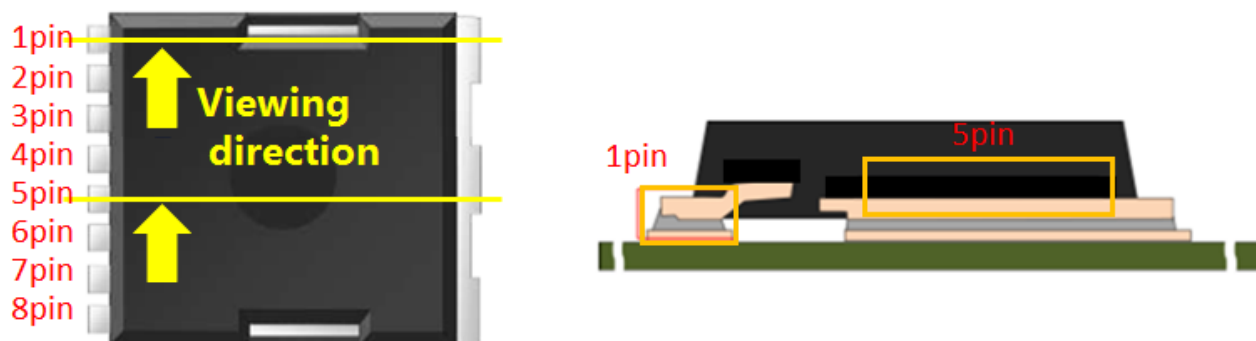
Cross-sectional view direction and cross-sectional view location
